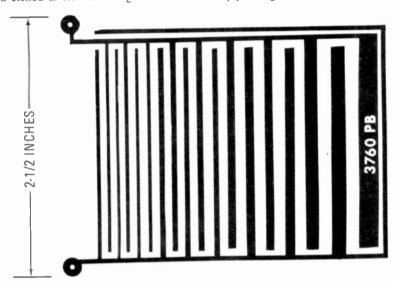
PITCH BENDER PC BOARD SHOWN FULL-SIZE.
